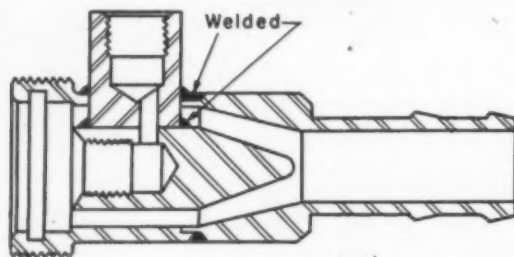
Below—Exhauster chamber weldment in which progressive welded assembly is used
